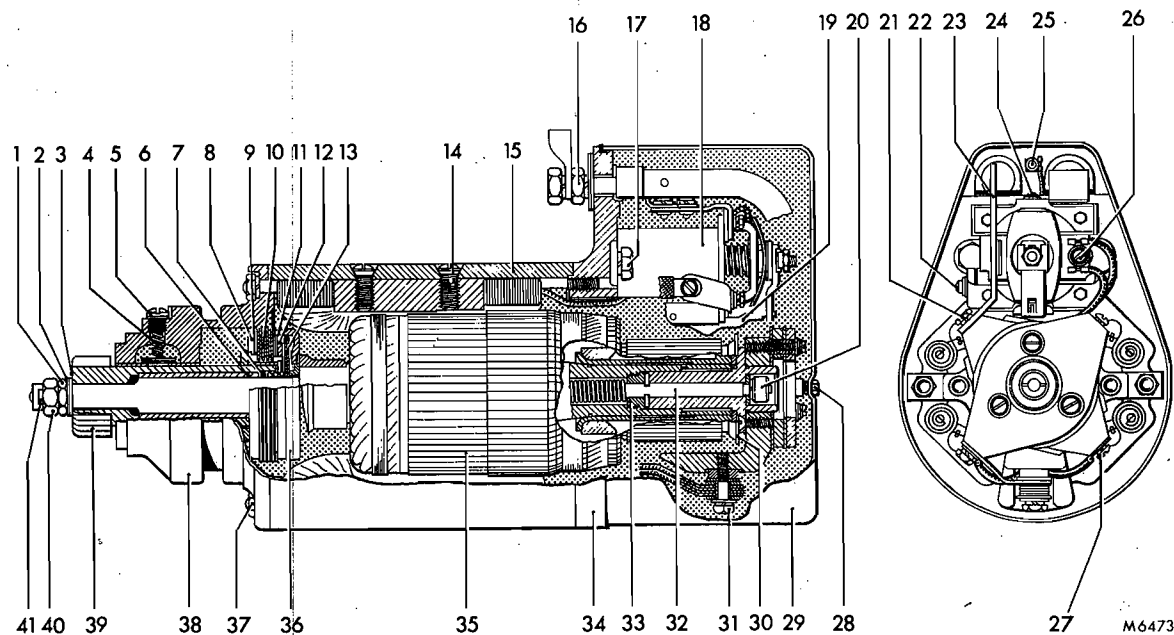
SECTIONAL VIEW OF C.A.V. STARTER MOTOR
